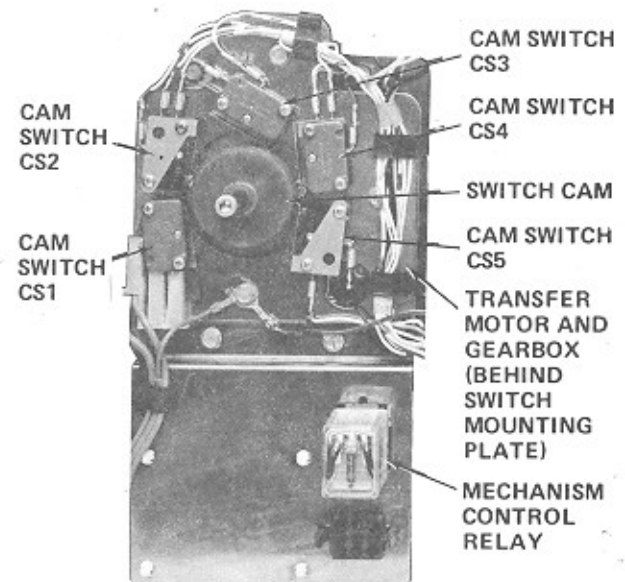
CAM SWITCH AND MOTOR ASSEMBLY COMPONENTS
